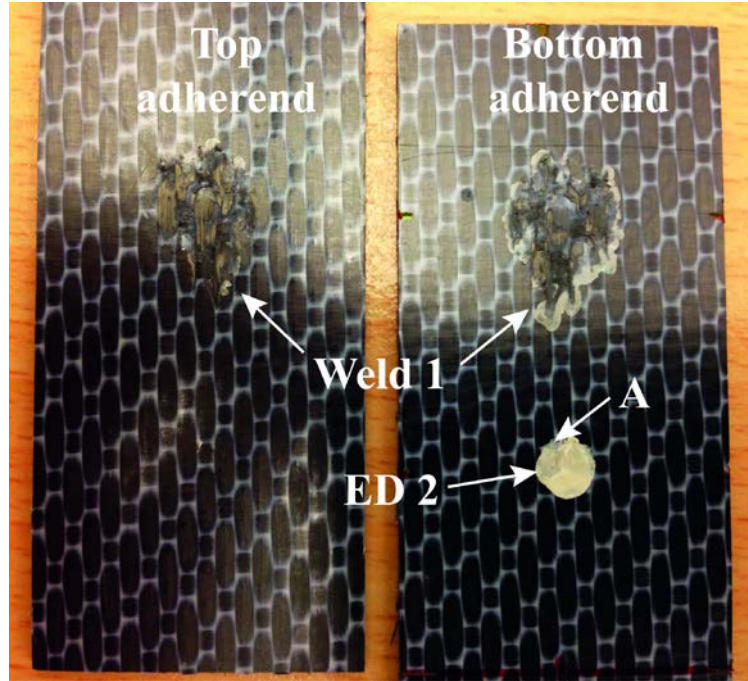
Fracture surfaces of a DSW joint after only welding the first spot. A: local melt of the ED caused by fixing to the adherend with handheld welder prior to welding process.
